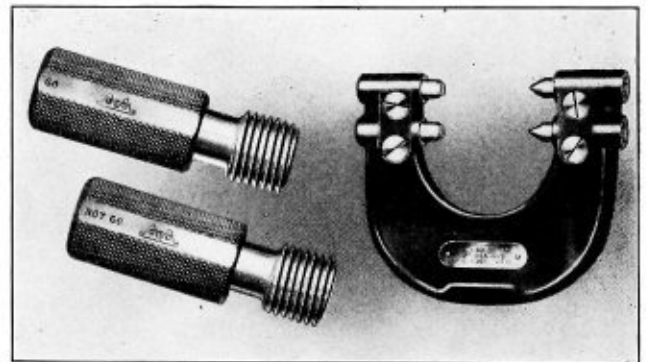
A Greenfield thread limit gage and master gages used for the inspection of staybolts
